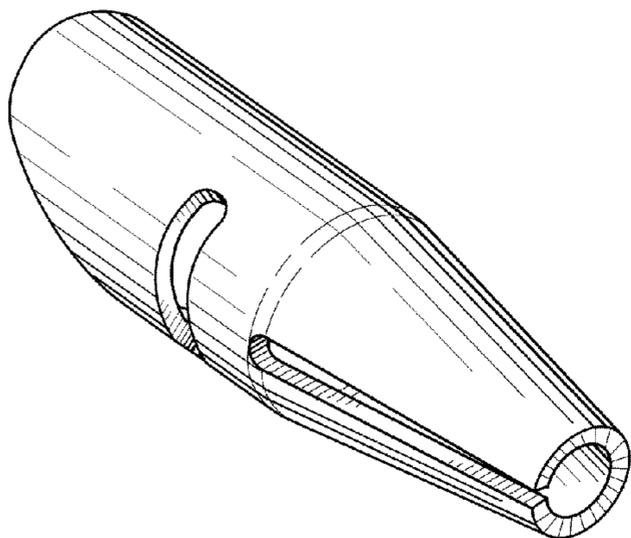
is a bottom, front, left perspective view of a third modified embodiment of the suture trap shown in FIGS. 1 through 9;
